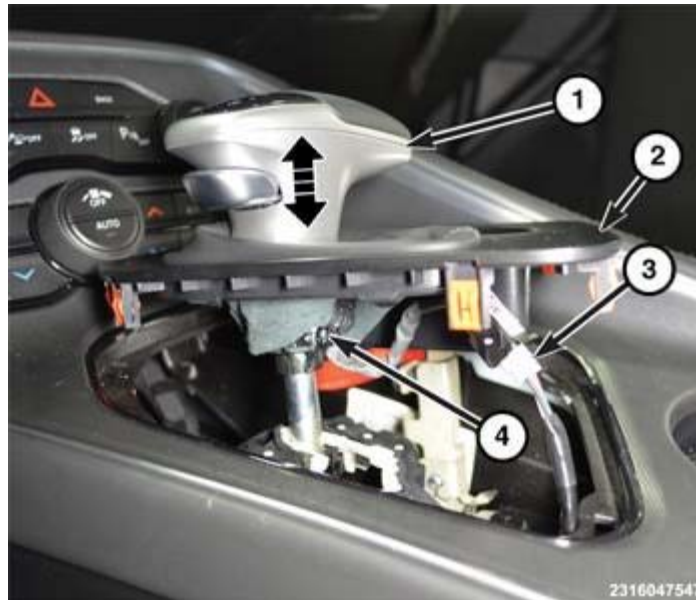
Shifter Knob, Shifter Bezel, Wire Harness Connector & Screw
